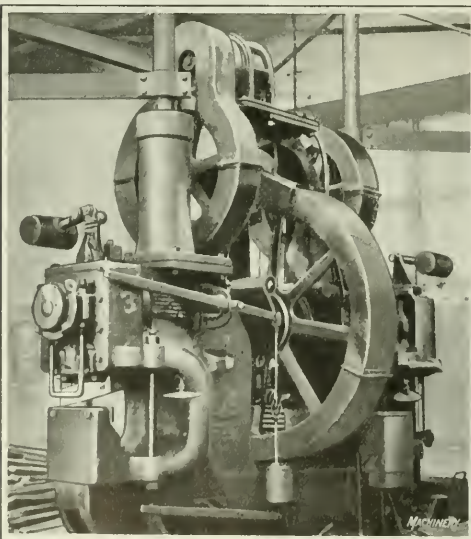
Punch and Shear driven by a 10-horsepower Alternating-current Motor
